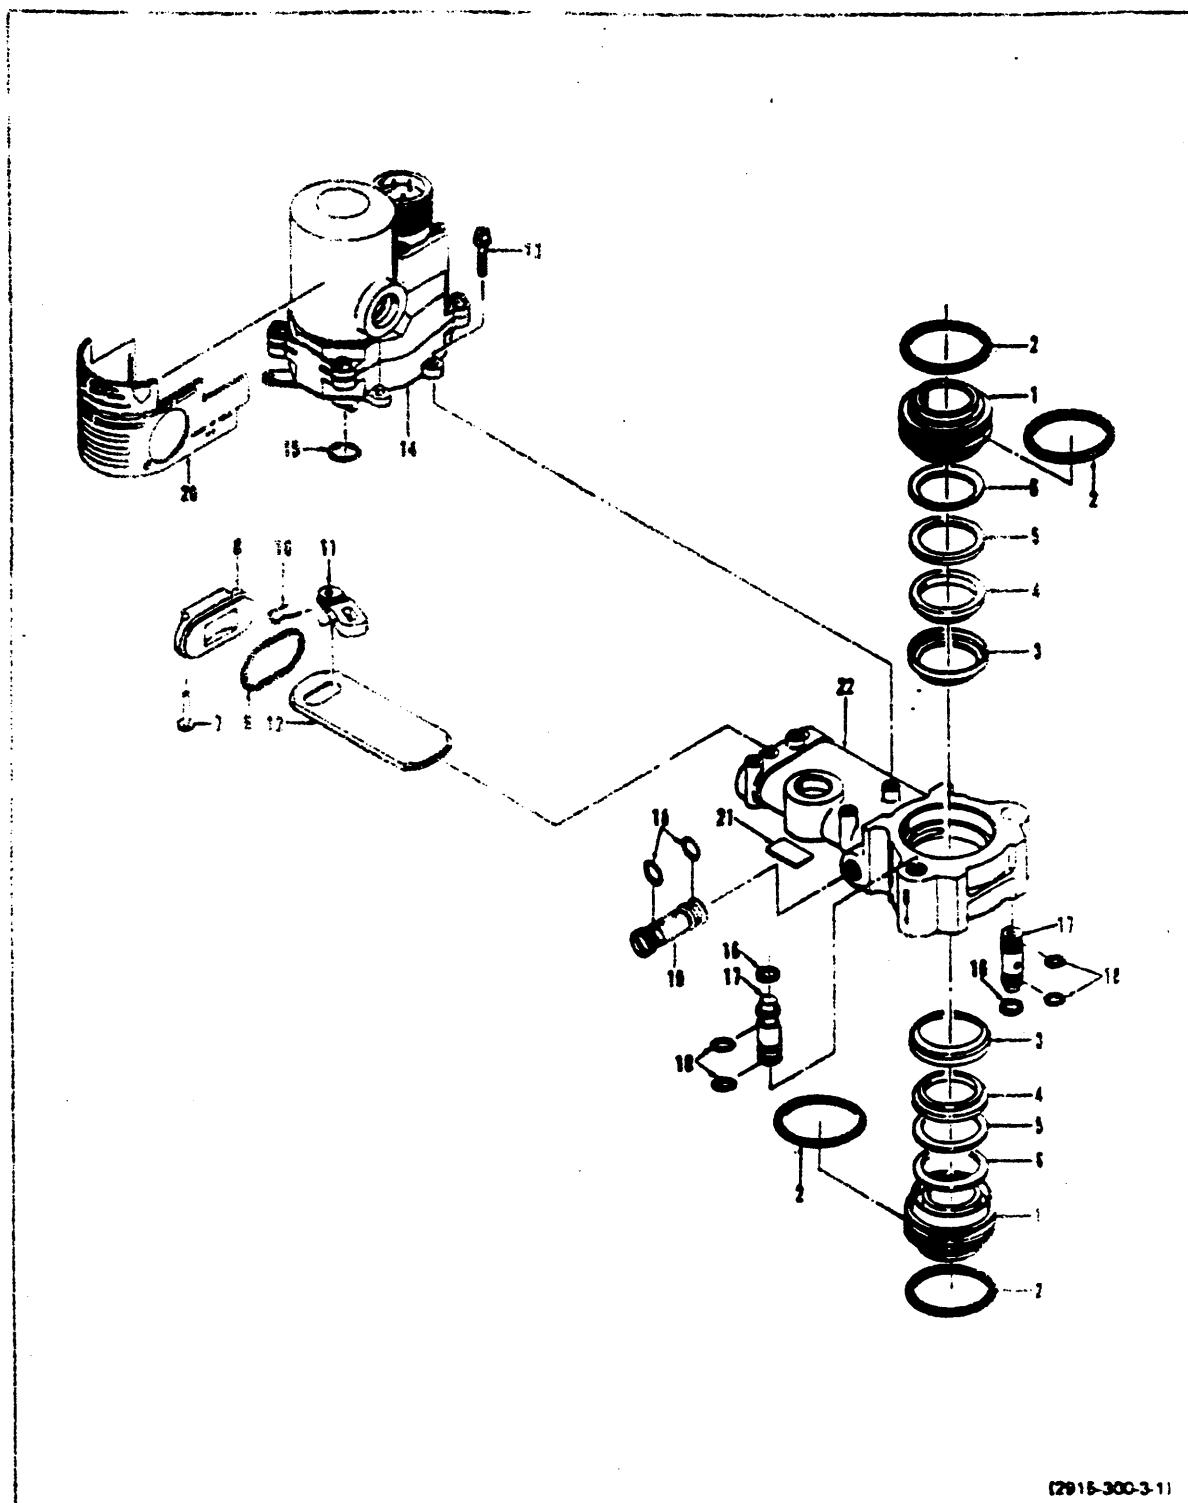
Gate Shutoff Valve Assembly, Part No. AV16B1294D and AV16B1296D
